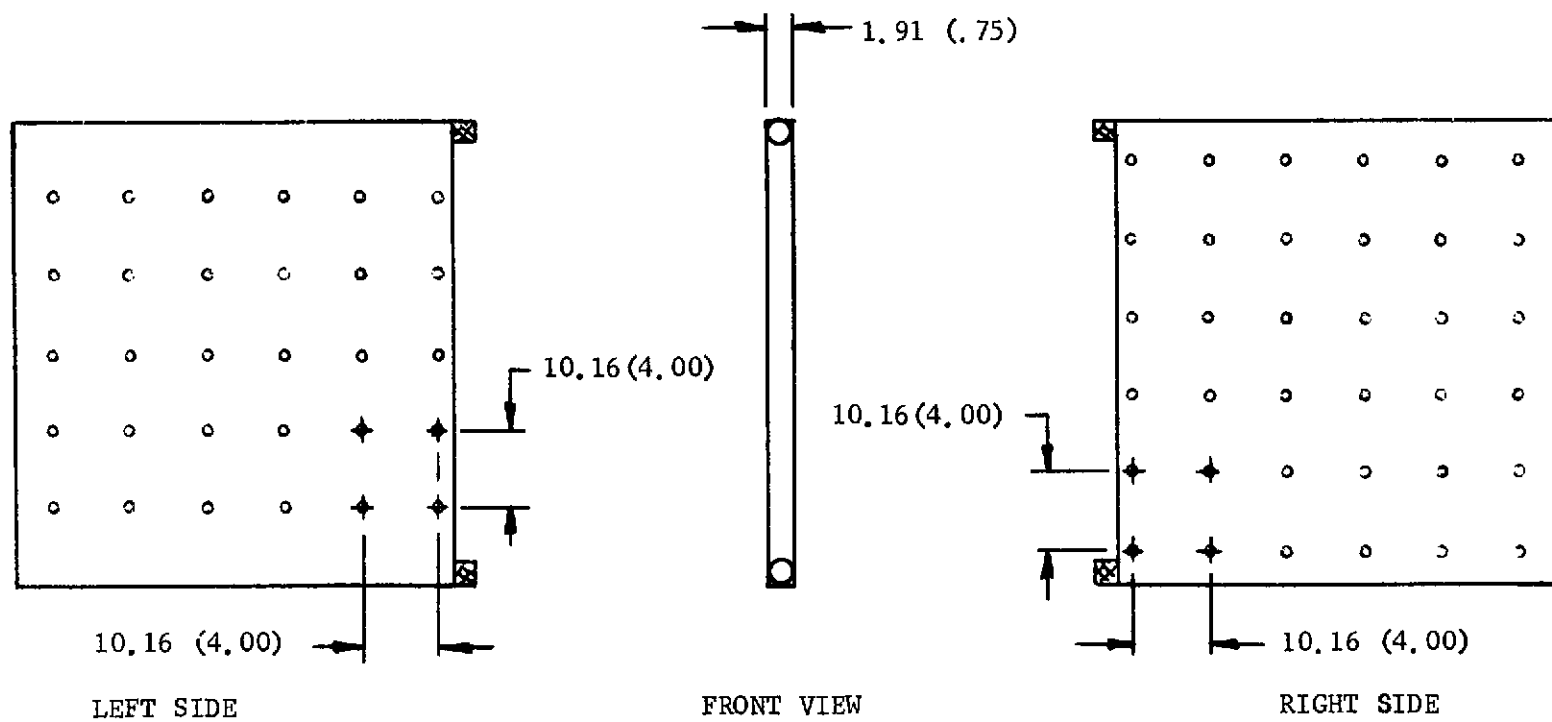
FASTENER PATTERN - CENTRAL DIVIDER
